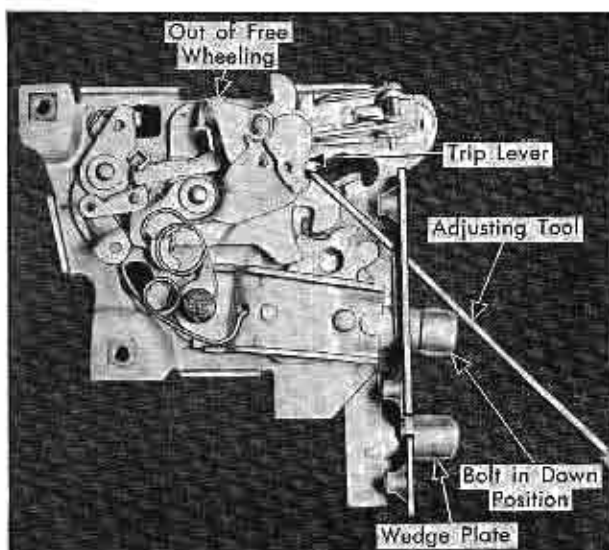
Adjusting Rear Door Lock to Free Wheeling
